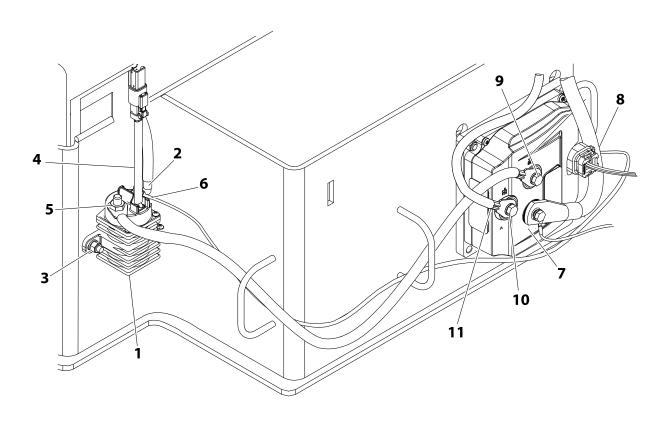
Main Power Contactor Relay and Pump Controller Module Location
